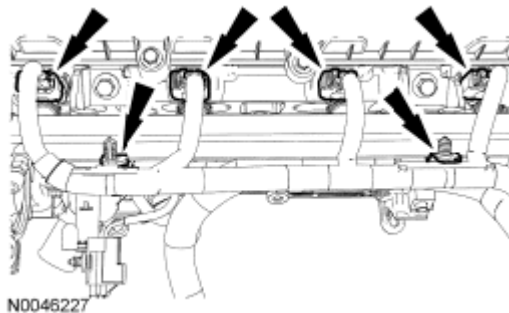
Locating Fuel Injector Electrical Connectors And Wiring Harness Pin-Type Retainers
